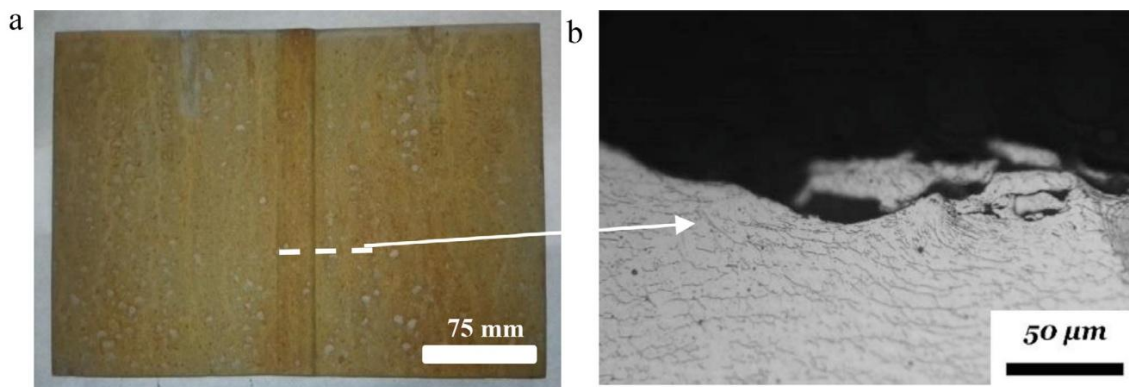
316Ti: (a) Specimen surface after salt spray test. Dash line indicates the area of the metallographic examination on transverse cross section; (b) Morphology of exfoliation corrosion at the weld metal
